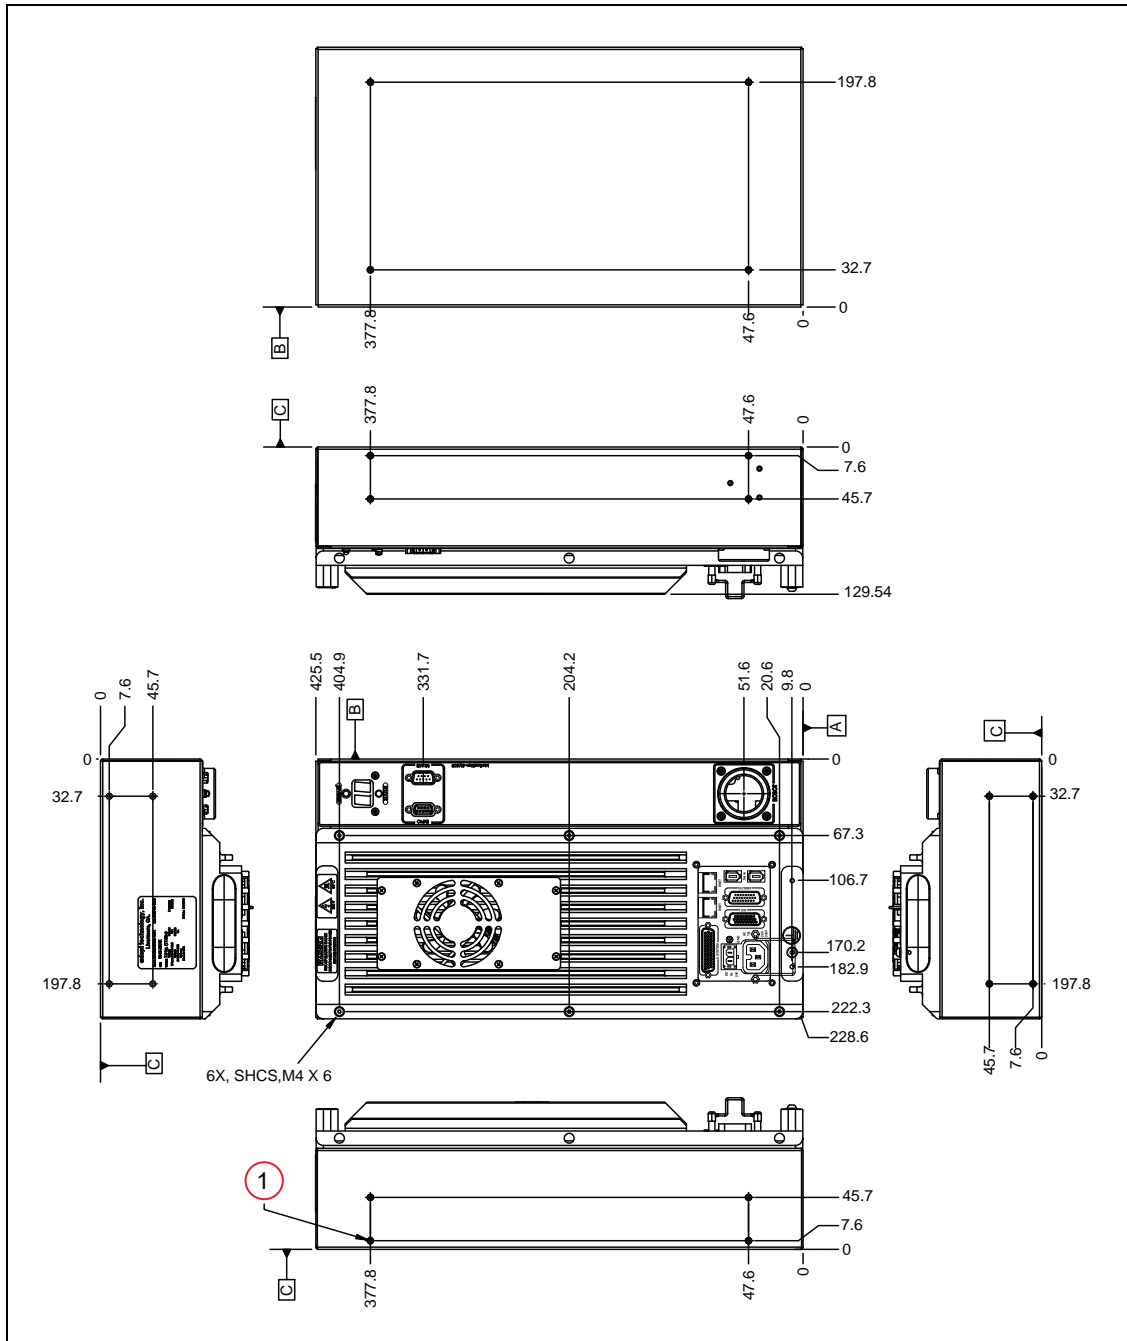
eMB-40R Mounting Dimensions. (1) M4 X 7 mm DP blind studs spaced as shown, 20X (Units in mm).
